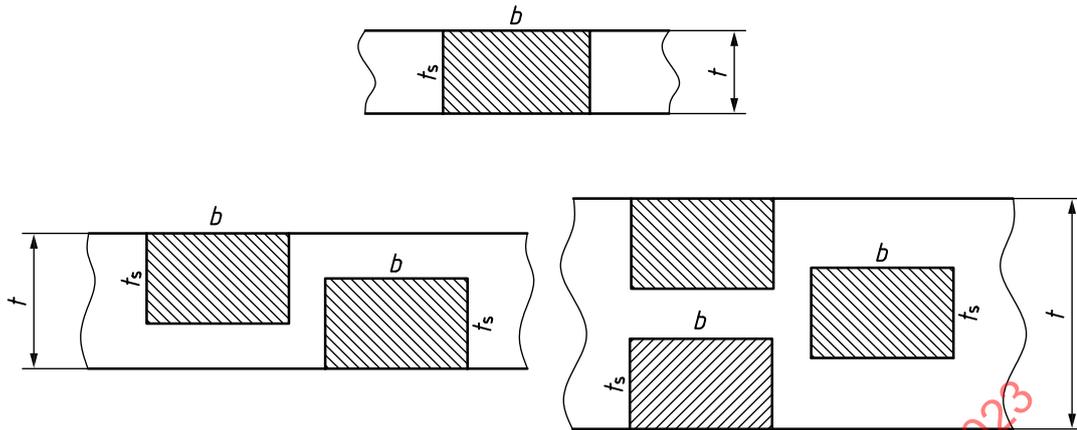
Root and face bend test specimens for a butt weld (TFBB, TRBB, LFBB, LRBB and FBCB)
